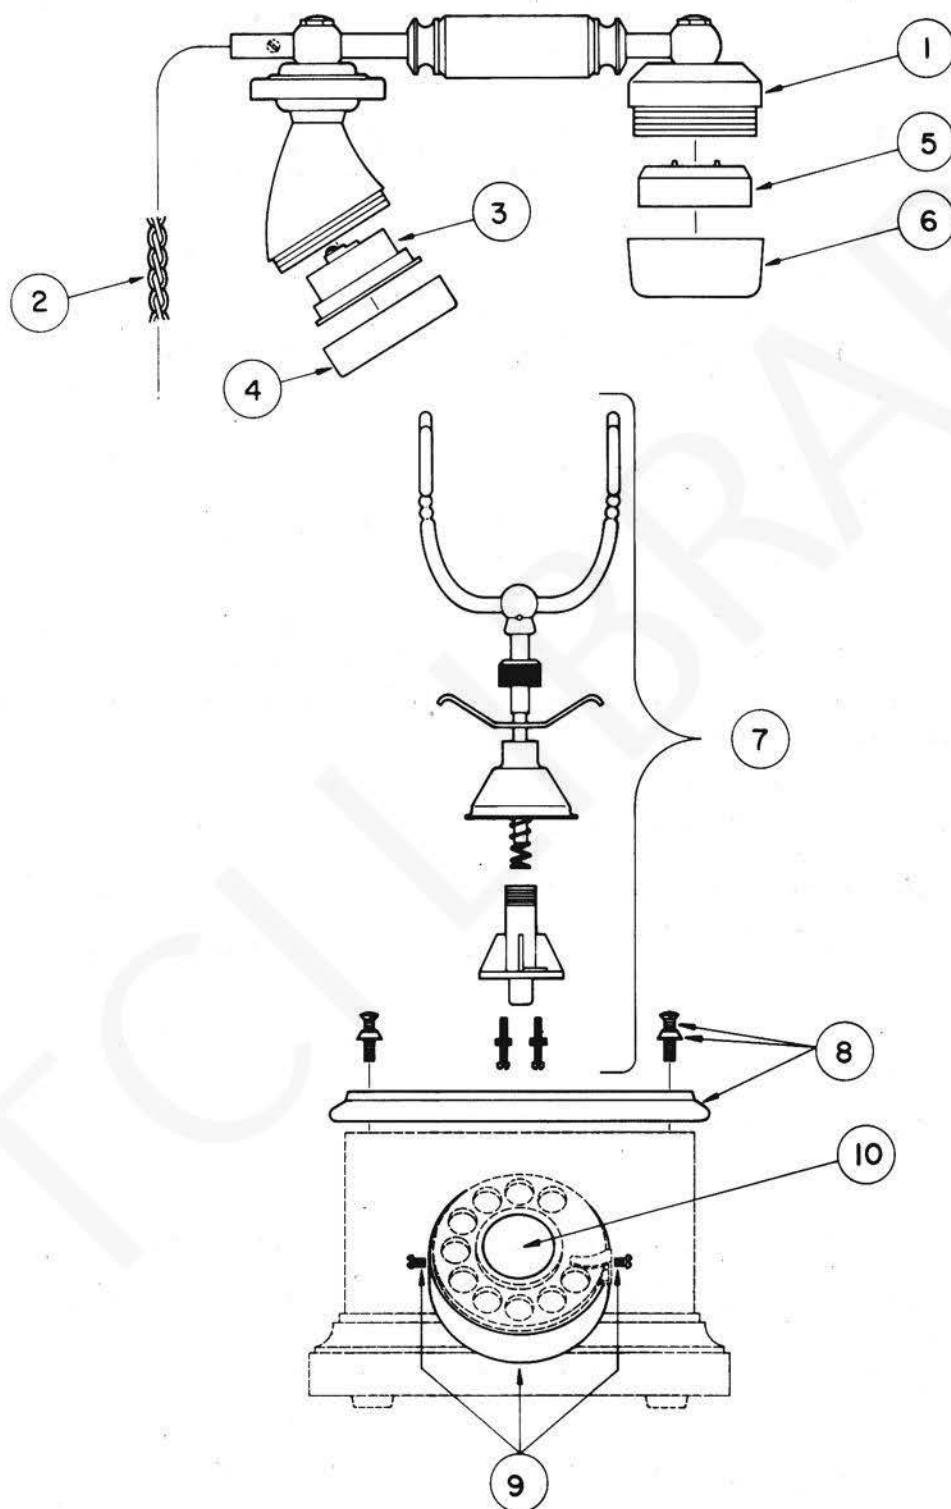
Exploded View of MD9152 Telephone Set (Moderne)
